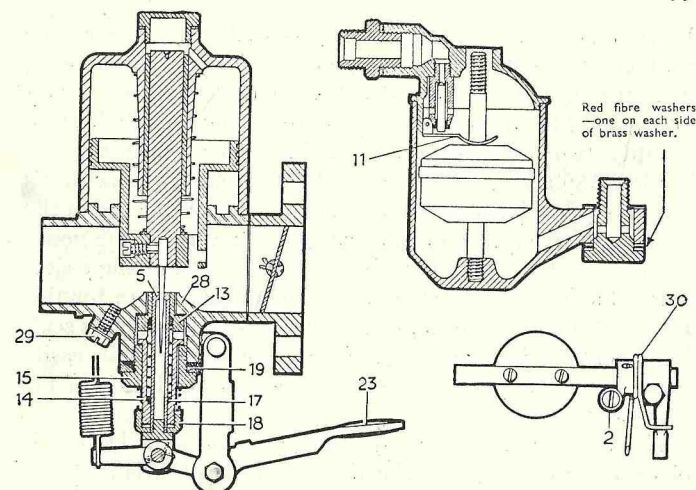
SECTIONAL VIEWS OF S.U. CARBURETTER, TYPE MC2.
